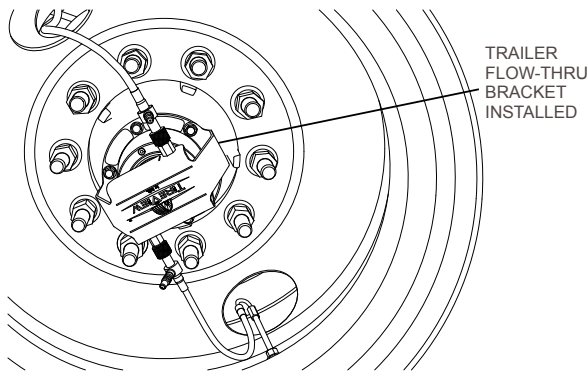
Trailer Flow-thru Bracket Installed - N-Spindles and P-Spindles
